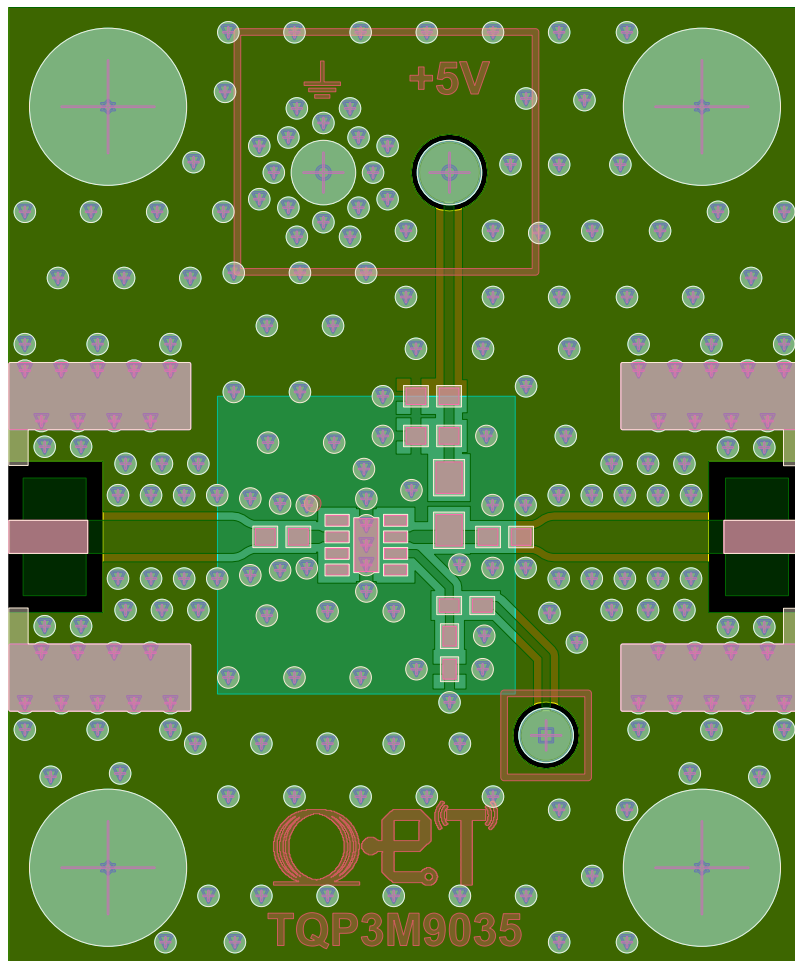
View of the Gerber files designed for the LNA TQP3M9035 board.
